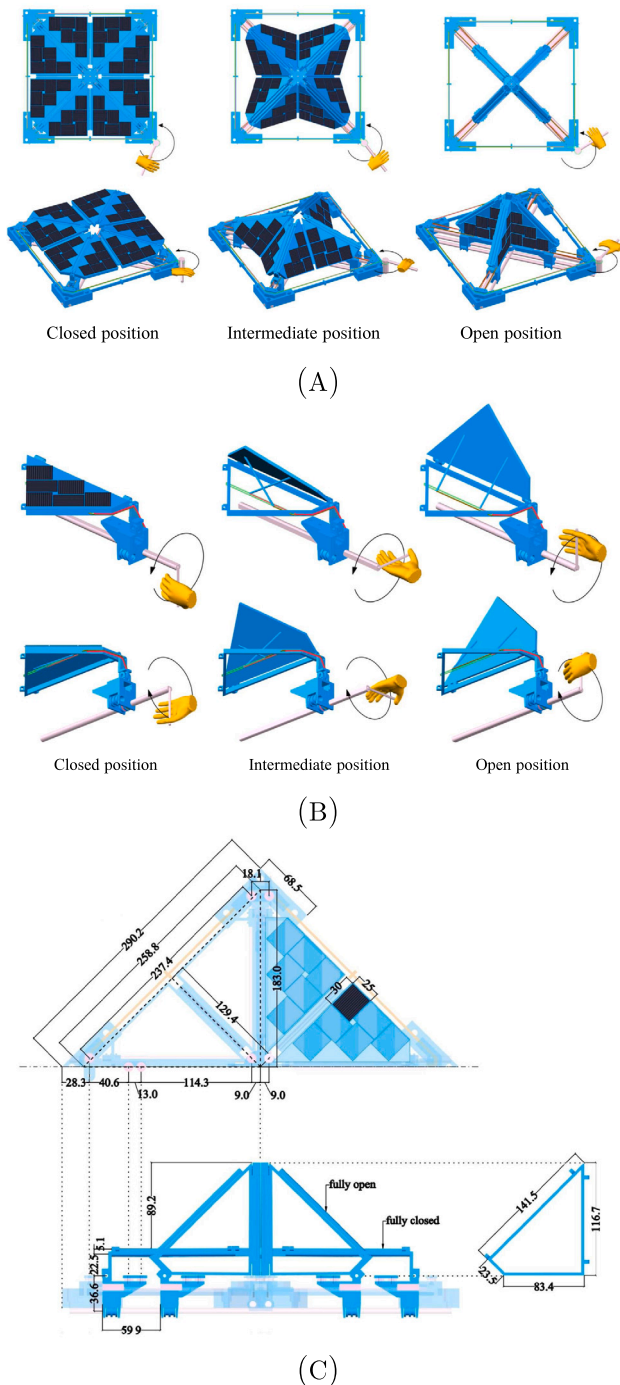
Opening and closing mechanisms of the primary (A) and secondary (B) folding motions of the quadrilateral solar eye module. (C) Dimensions in mm of the solar eye unit cell.
